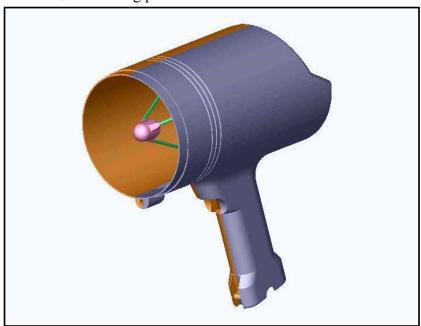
Engineering drawing of handheld CWD sensor prototype.
